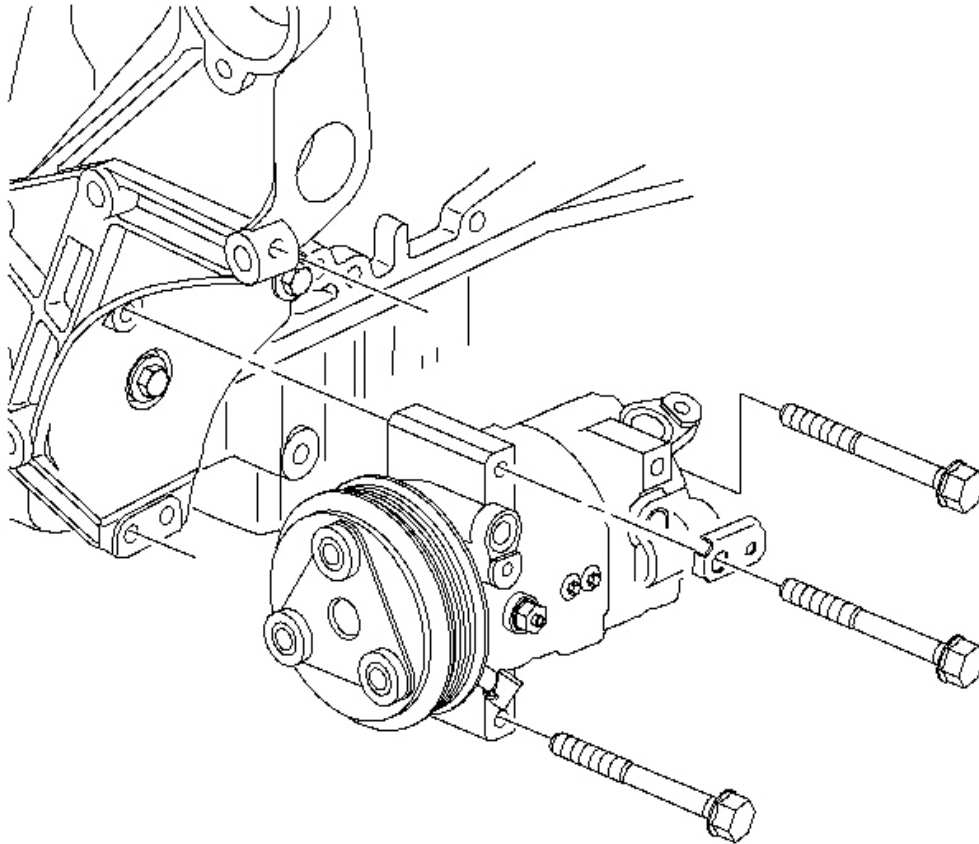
Removing/Installing Lower A/C Compressor Bolt
